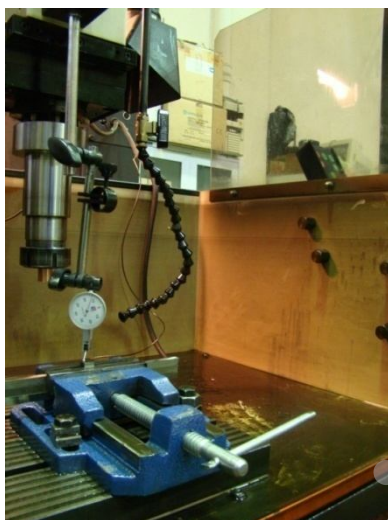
Illustration of copper tool electrode, TiAl workpiece sample and adjusting the work surface before each machining test
